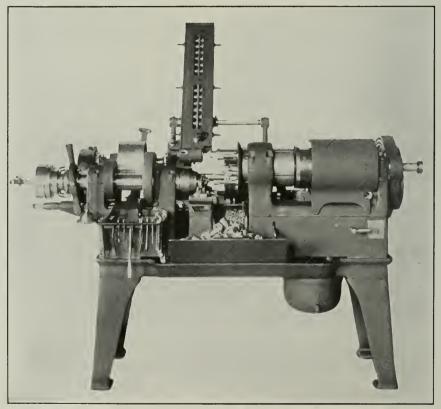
Cleveland Automatic Turret Machine with Magazine Attachment
